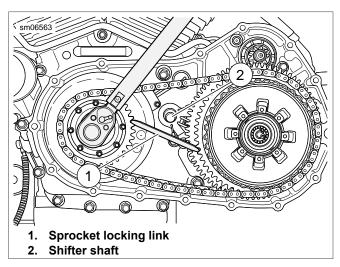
Tighten Engine Sprocket Fastener (typical)
